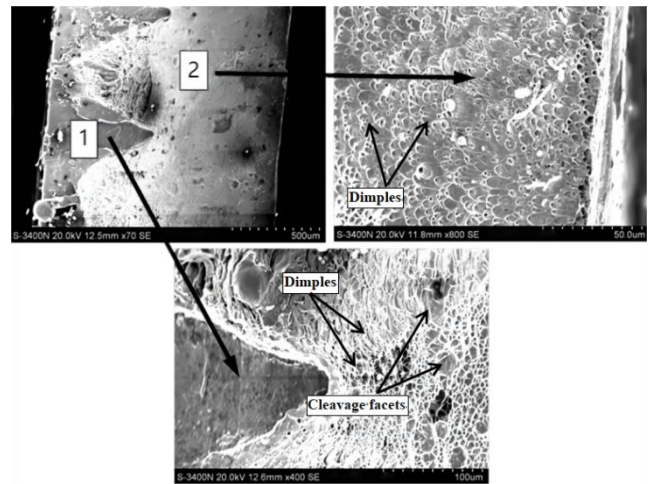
Fracture morphologies of tensile specimens with a heat input of 1.875 kJ/cm
